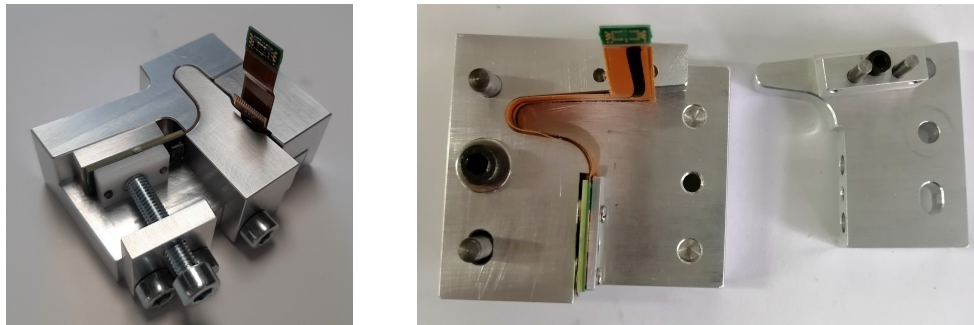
Photos of pigtails bending tools. Left - pigtail in the mold. Right - Open mold with shaped pigtail at the end of the bending process.
